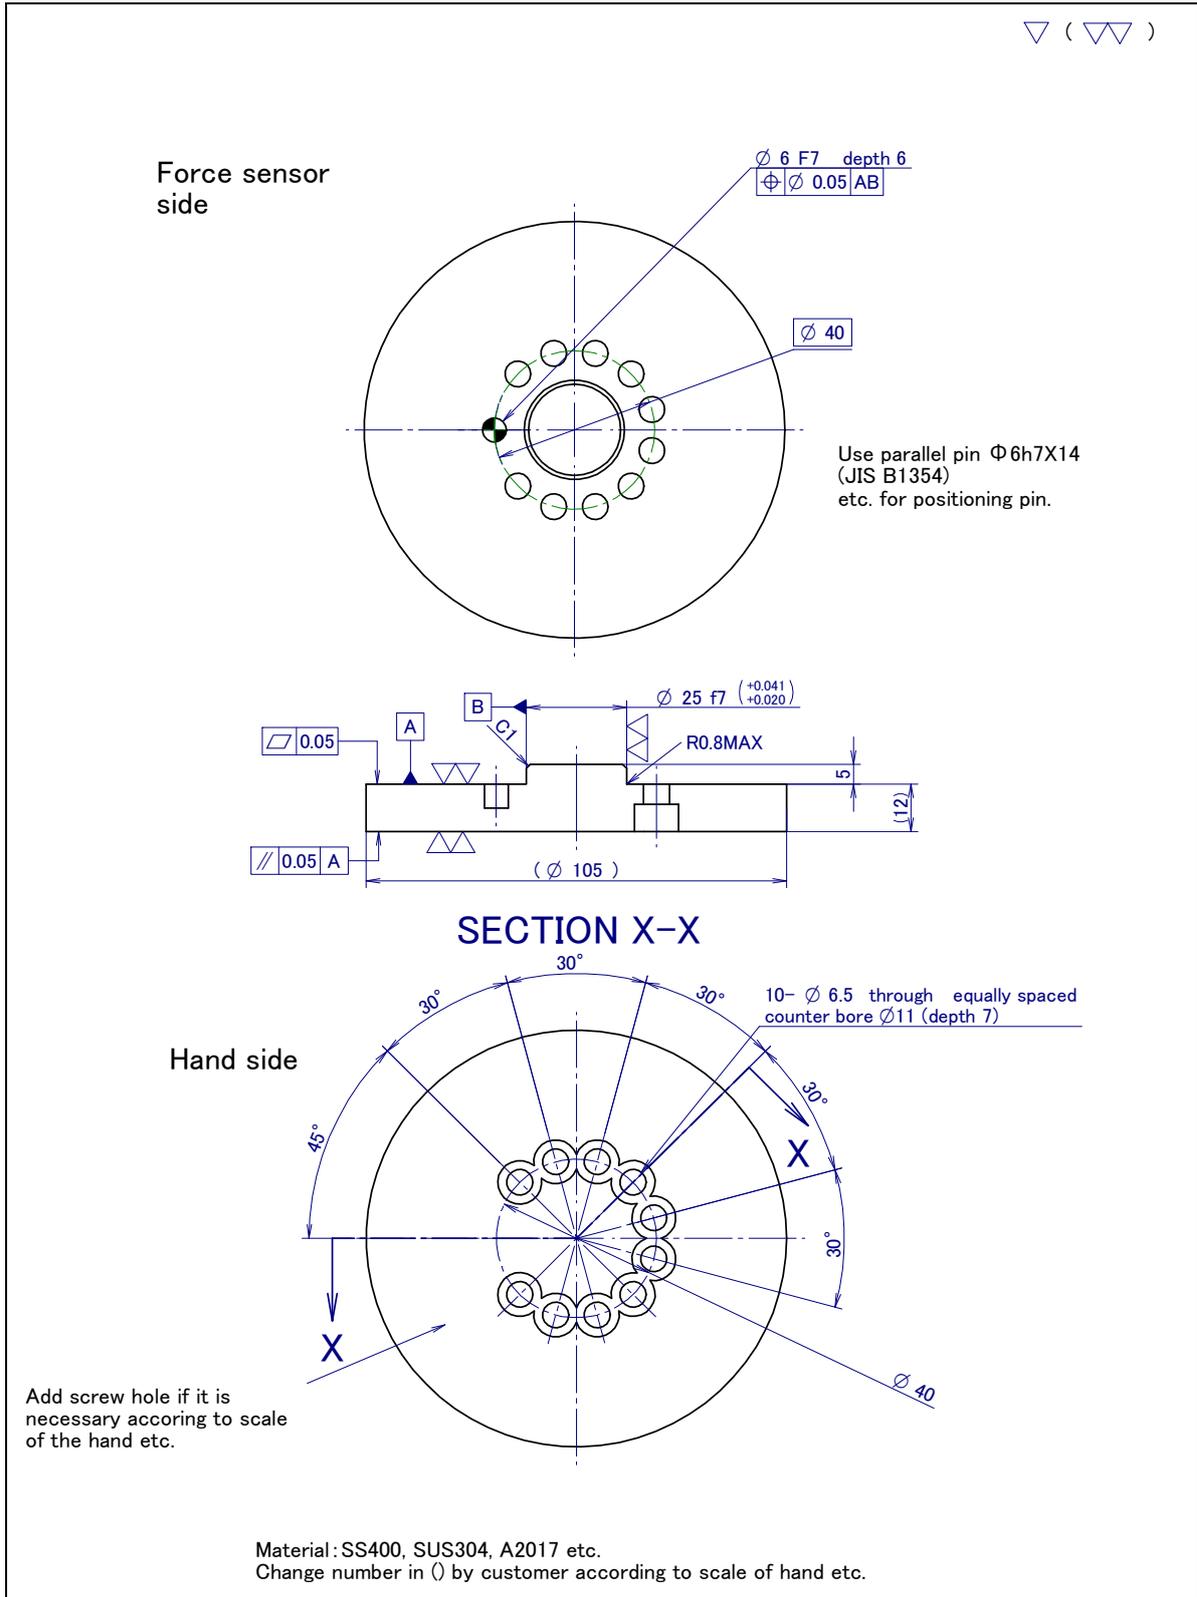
(b) Example of designing the hand mounting adapter (FS-40iA)
